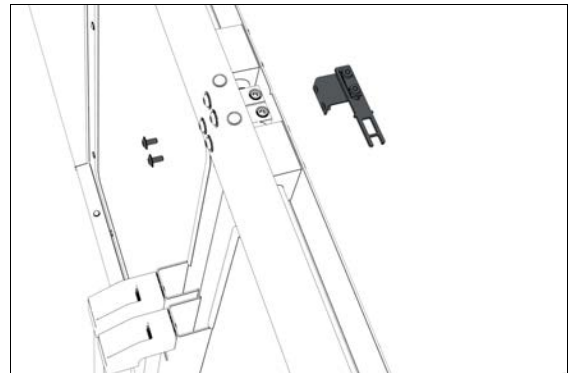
Attaching the lock key bracket assembly to the left side of the enclosure.
